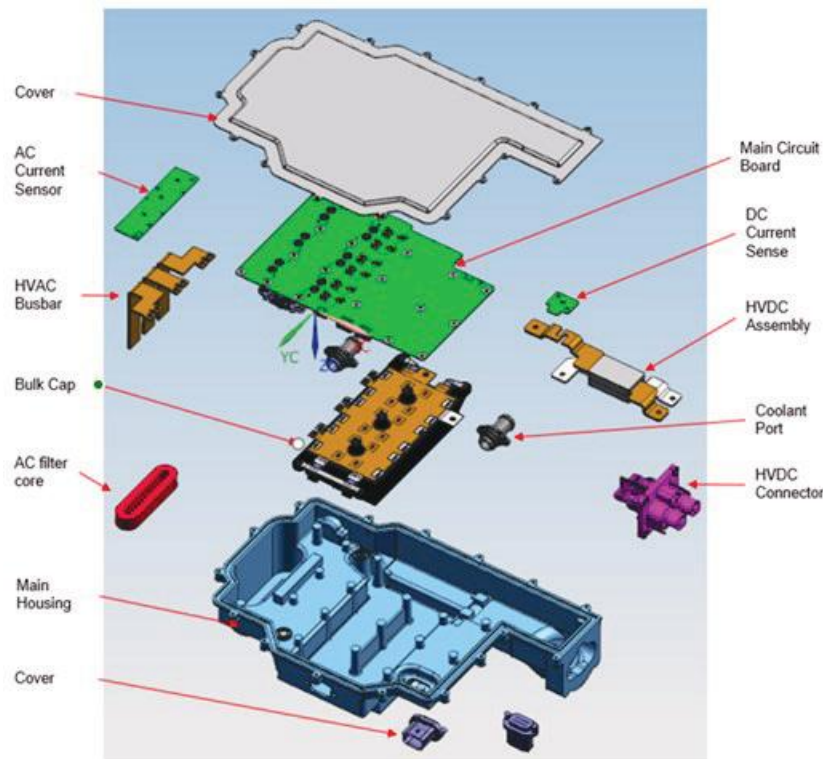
Inverter Design Concept - Assembly Exploded View
